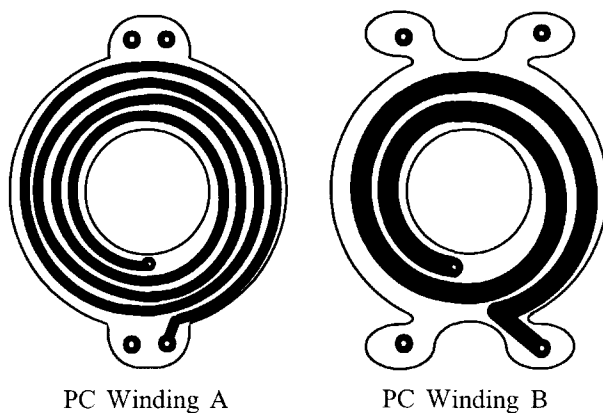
PC Winding Boards Showing Butterfly Pads.
